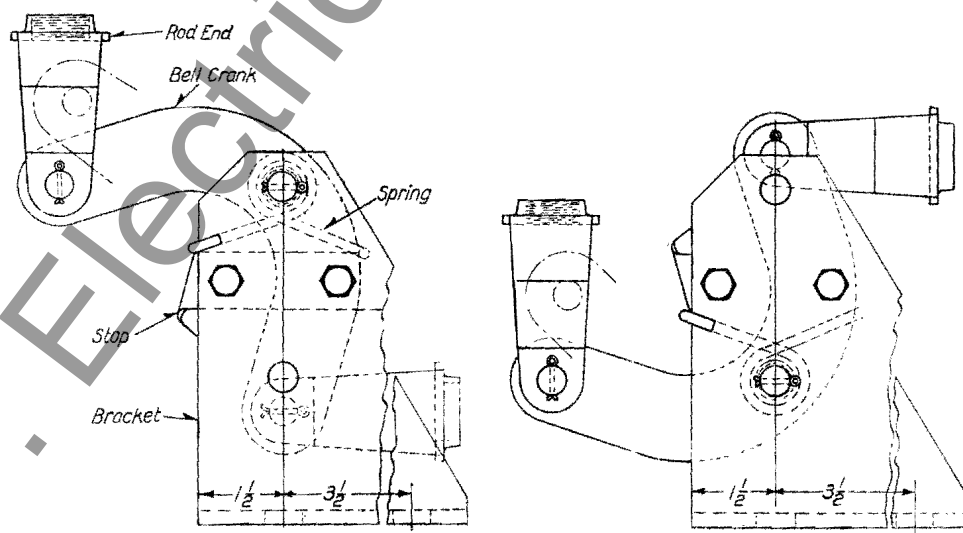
ACCELERATING DEVICE SHOWING ASSEMBLY FOR ABOVE AND BELOW FLOOR MOUNTING
